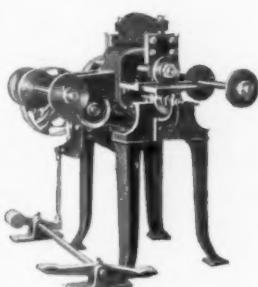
SINGLE SLITTER WITH WINDING ATTACHMENT.
